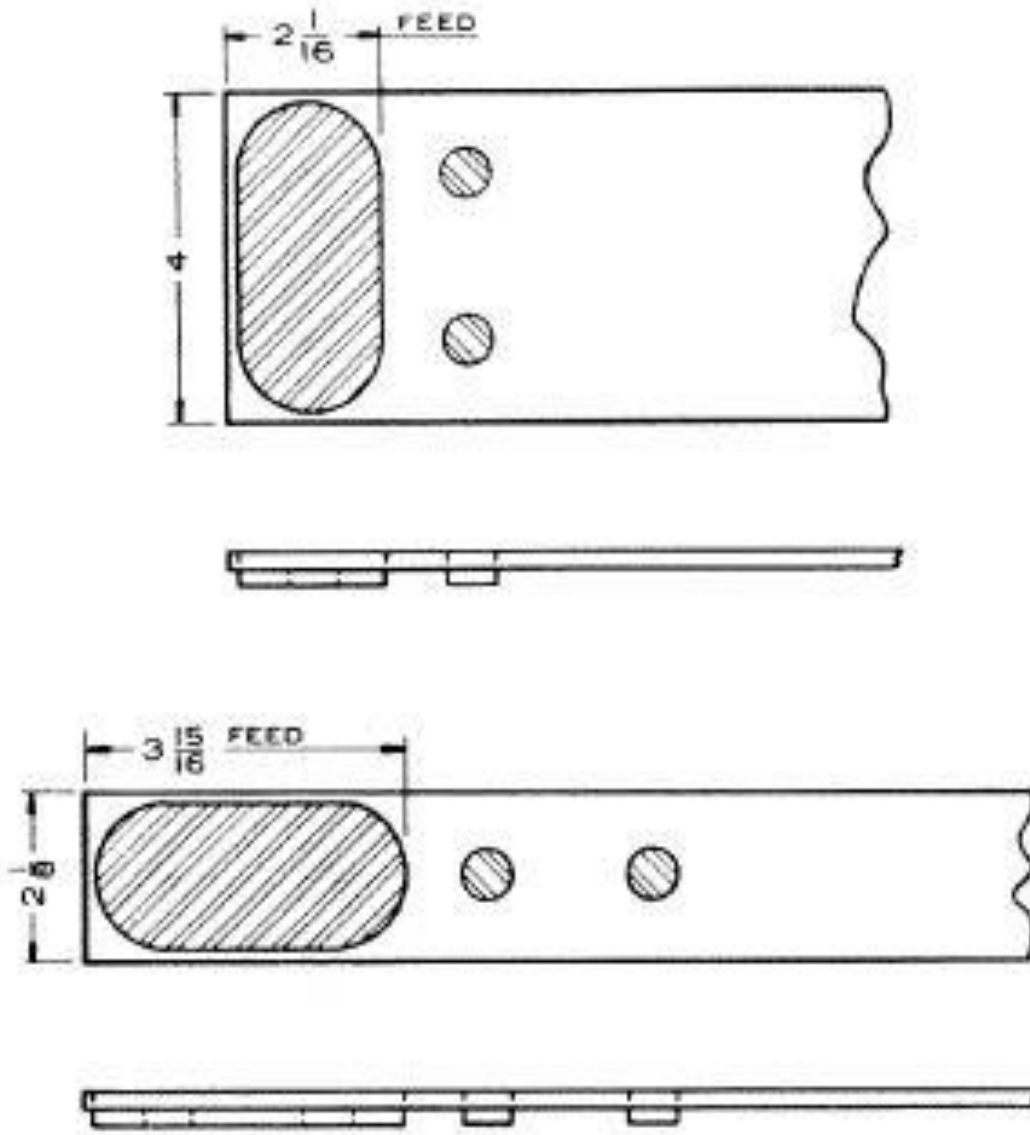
Blank layouts necessitating either wide or narrow strips.
